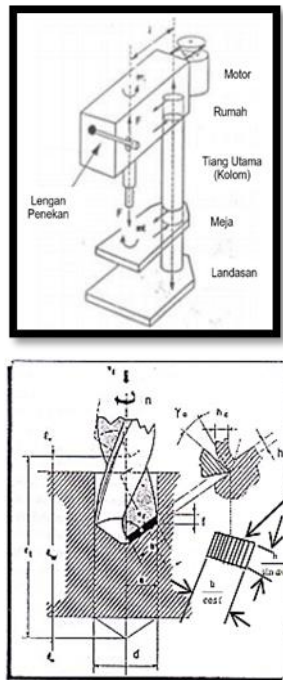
Drilling machine and drilling process (Rochim, 2007)
